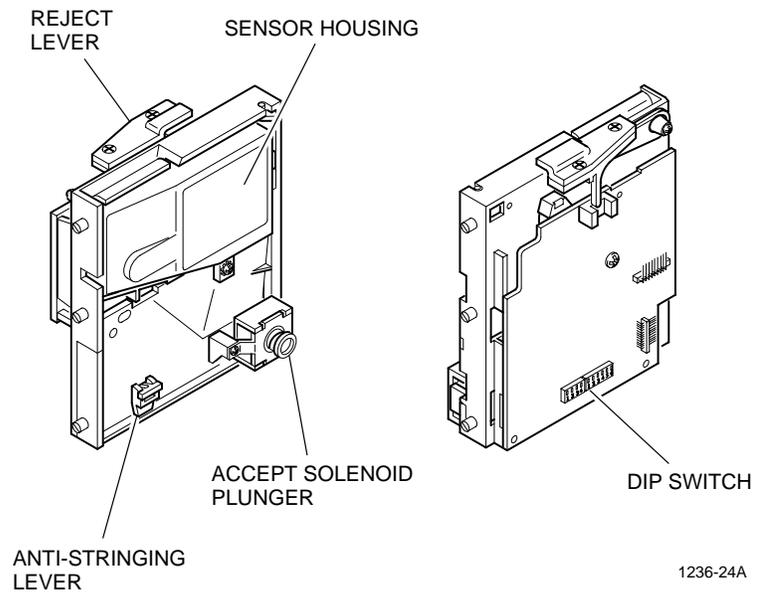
Coin-In Assembly – Coin Comparitor Removal.
